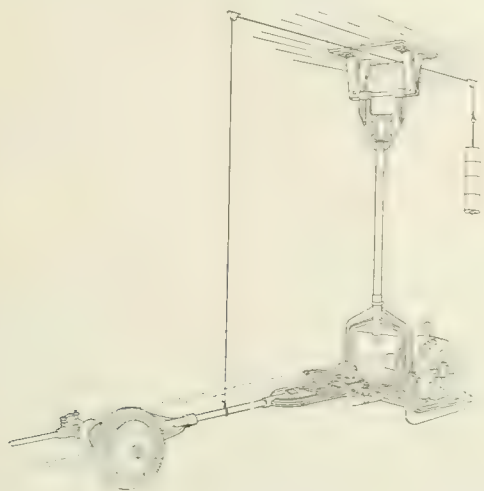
A Motor-Driven Swing Frame Emery Wheel Grinder Built by the Pittsburgh Emery Wheel Company, Pittsburgh, Pa.
